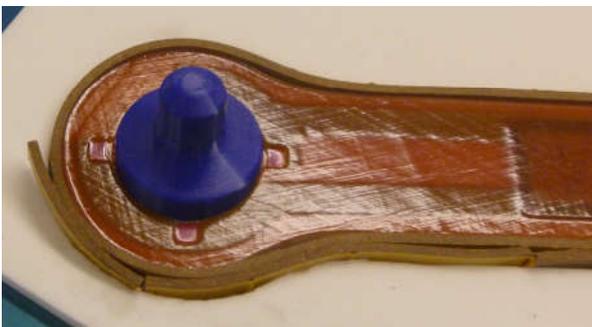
Insertion of cork strips to fix the workpiece against the mold. Also visible are an actuator (right), electrical conductor tracks inside the facesheet, contact surfaces (protected by cover layers, red).
